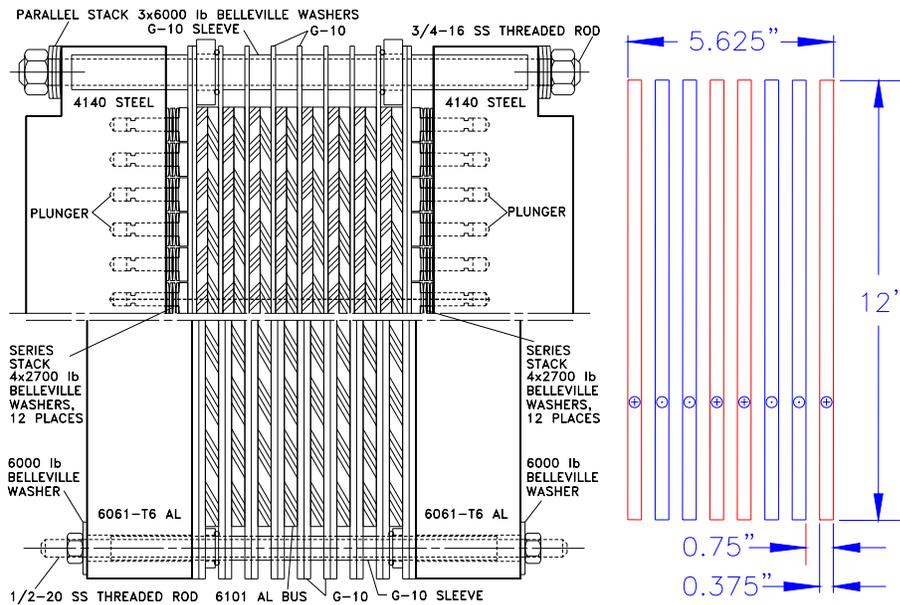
Stripline Drawing and Pictorial Cross Section.
